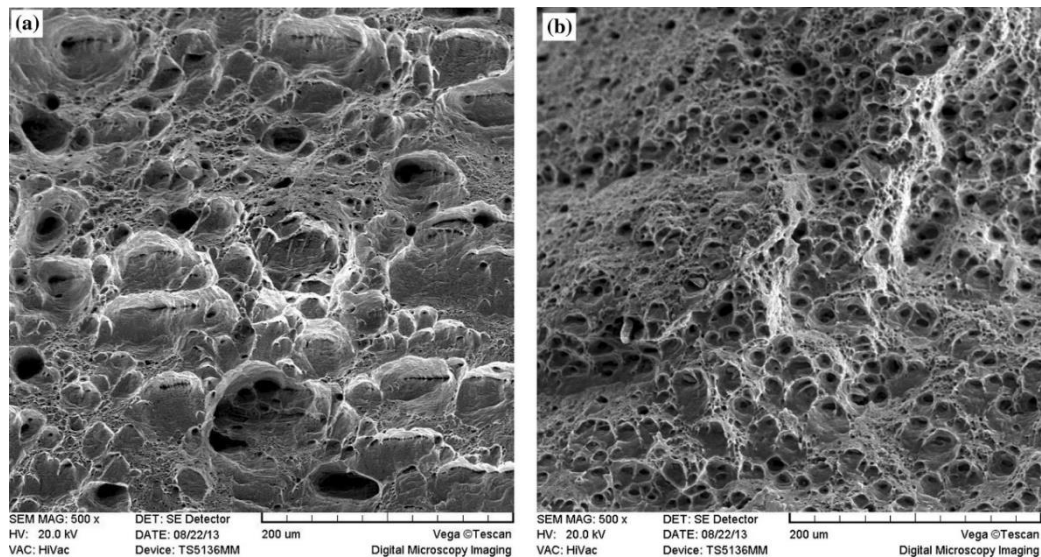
Fracture surface of the joints: (a) joint 8 and (b) joint 9
